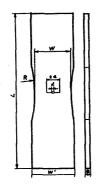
CENTER NOTCH TENSILE TEST SPECIMEN
